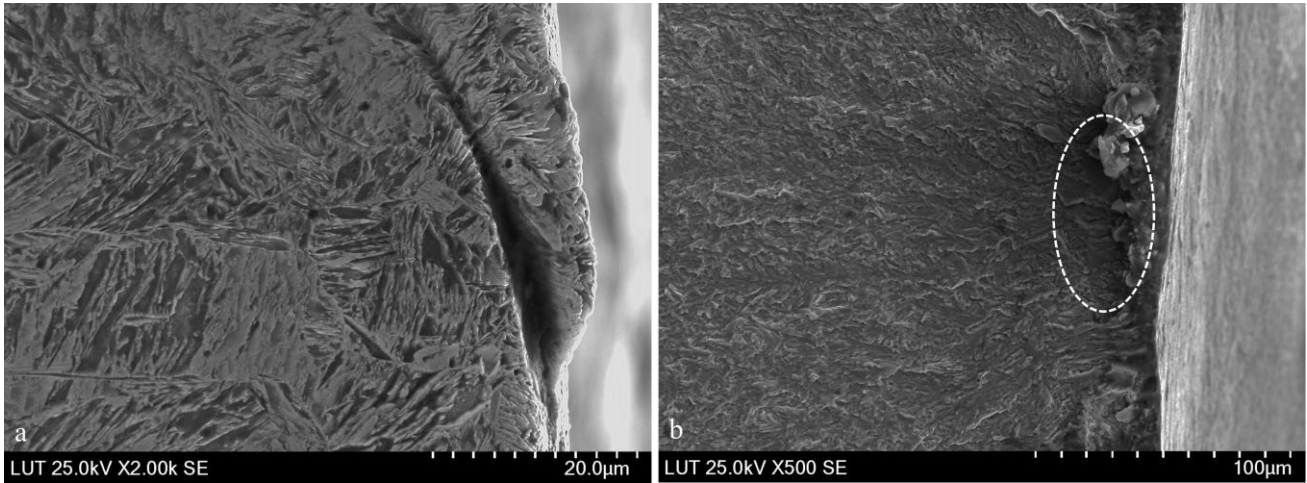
(a) Defect in the fiber laser fusion cut S690 specimen and (b) detail from the crack origin fracture surface (2 Columns)
